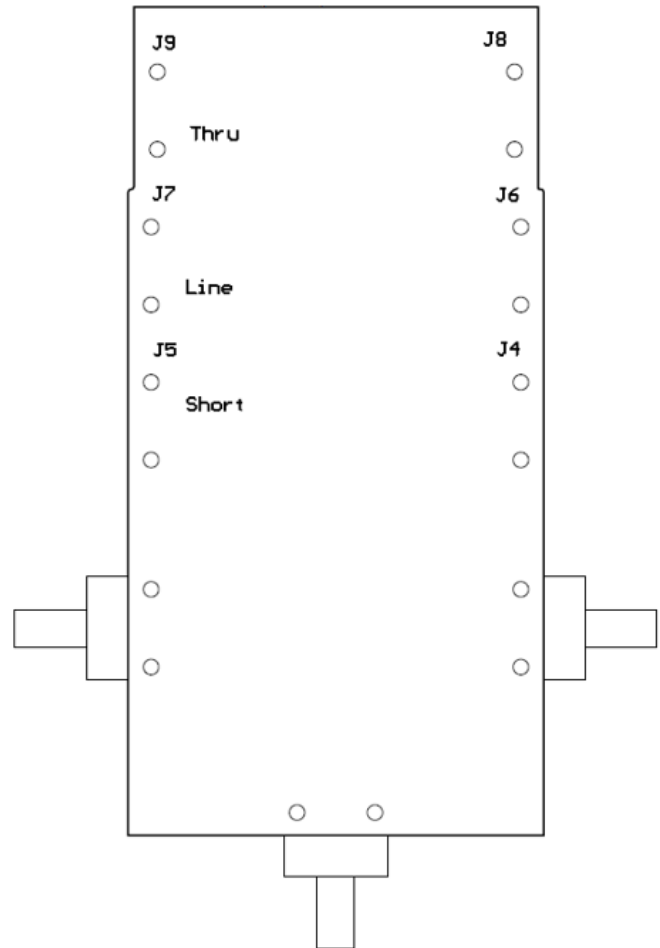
OTSW101-EVAL Assembly Drawing (Bottom)
